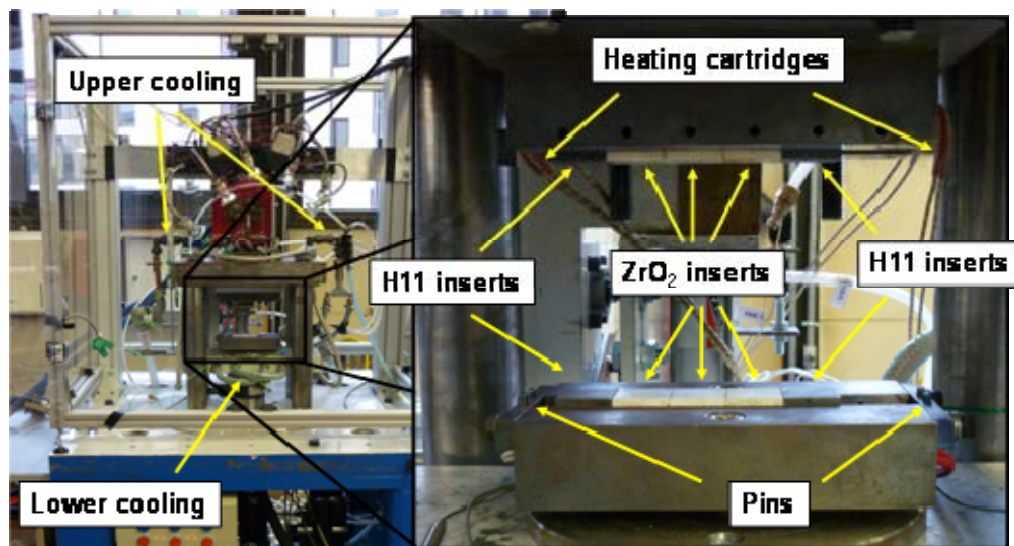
Equipment setup for plane stamping tests with hot dies
